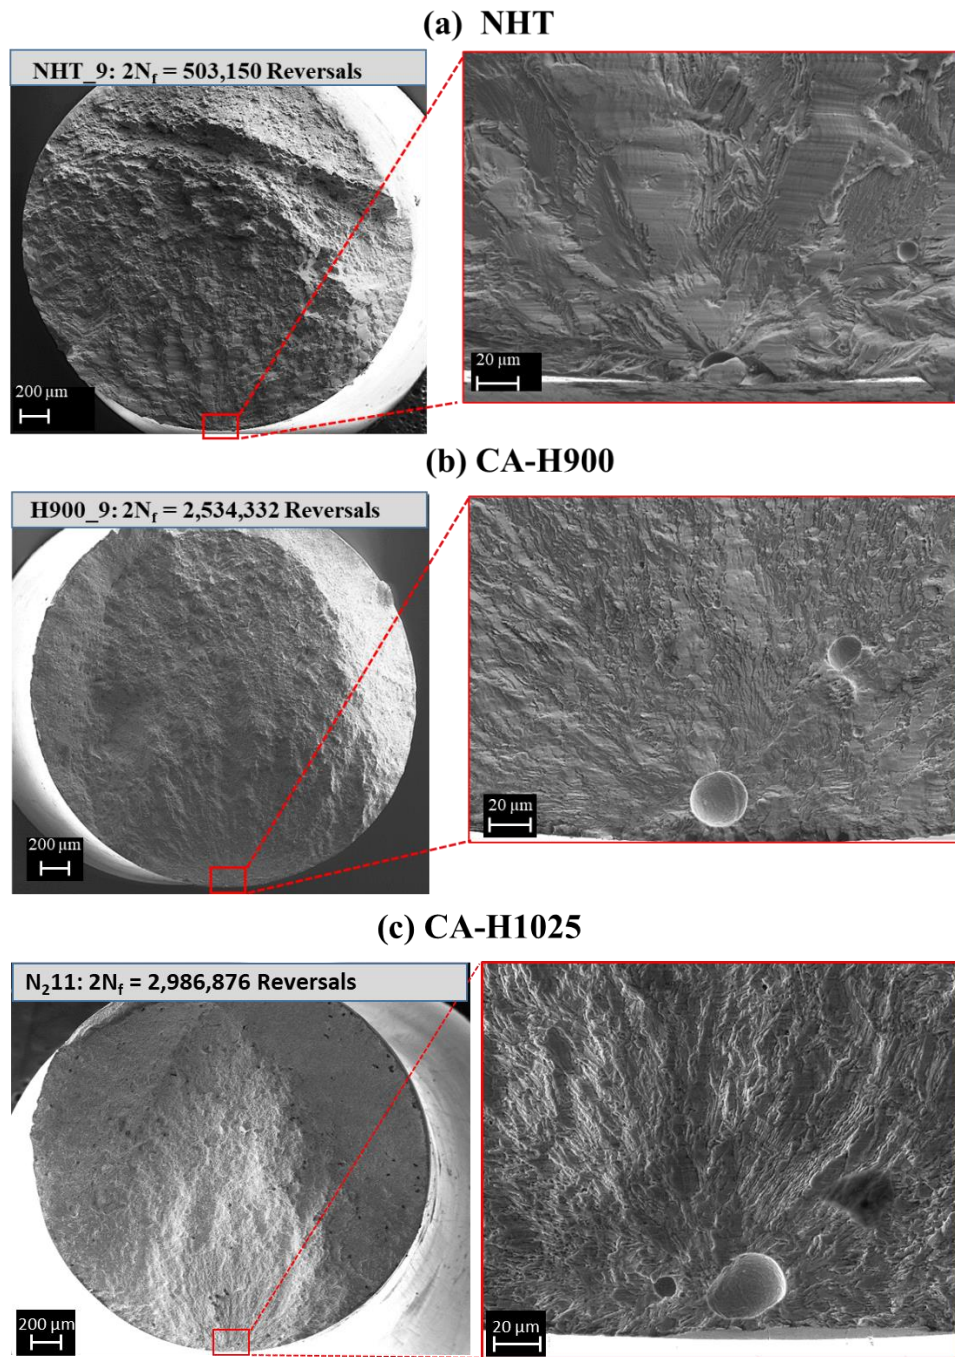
Fracture surfaces of L-PBF 17-4 PH SS specimens with hourglass gauge tested at 550 MPa: (a) NHT heat-treated specimen with 503,150 reversals to failure, and (b) CA-H900 specimen with 2,534,332 reversals to failure, and (c) CA-H1025 specimen with 2,986,876 reversals to failure.
